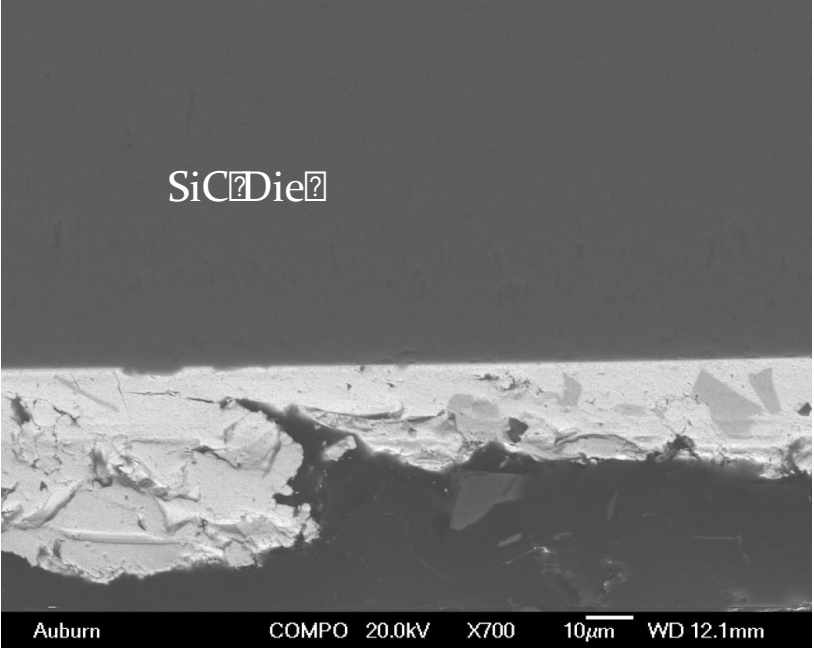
Cross Section of Die-side after Die Shear showing Failure in the Solder
